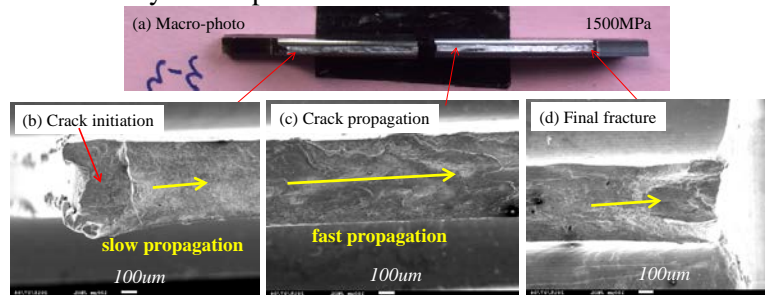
SEM-photos of 1500MPa shear specimen along fracture surface: (a) macro-photo, (b) around crack initiation position, (c) crack propagation zone, (d) final fracture.
